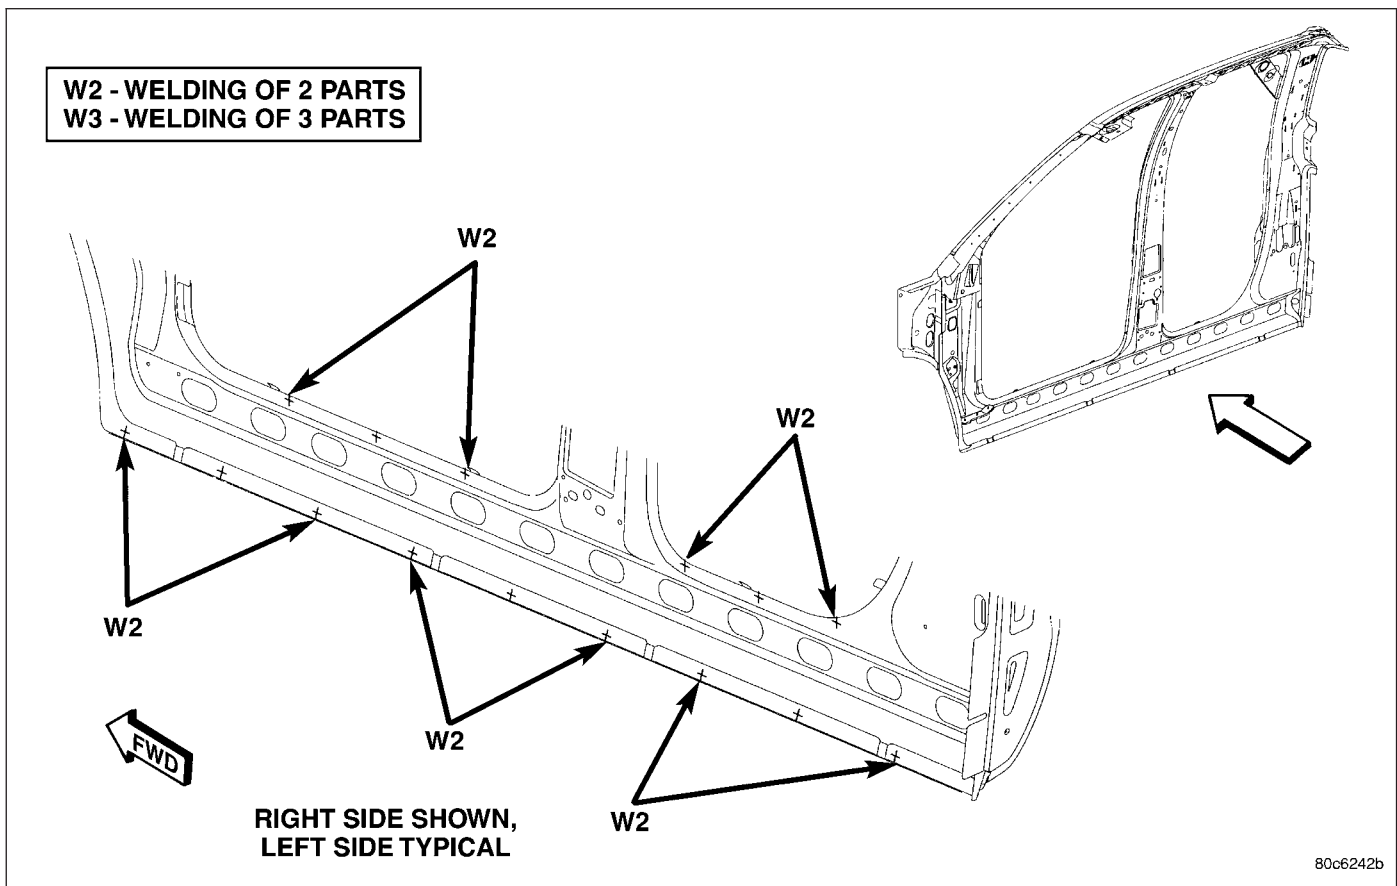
OUTER BODY SIDE APERTURE - QUAD CAB
